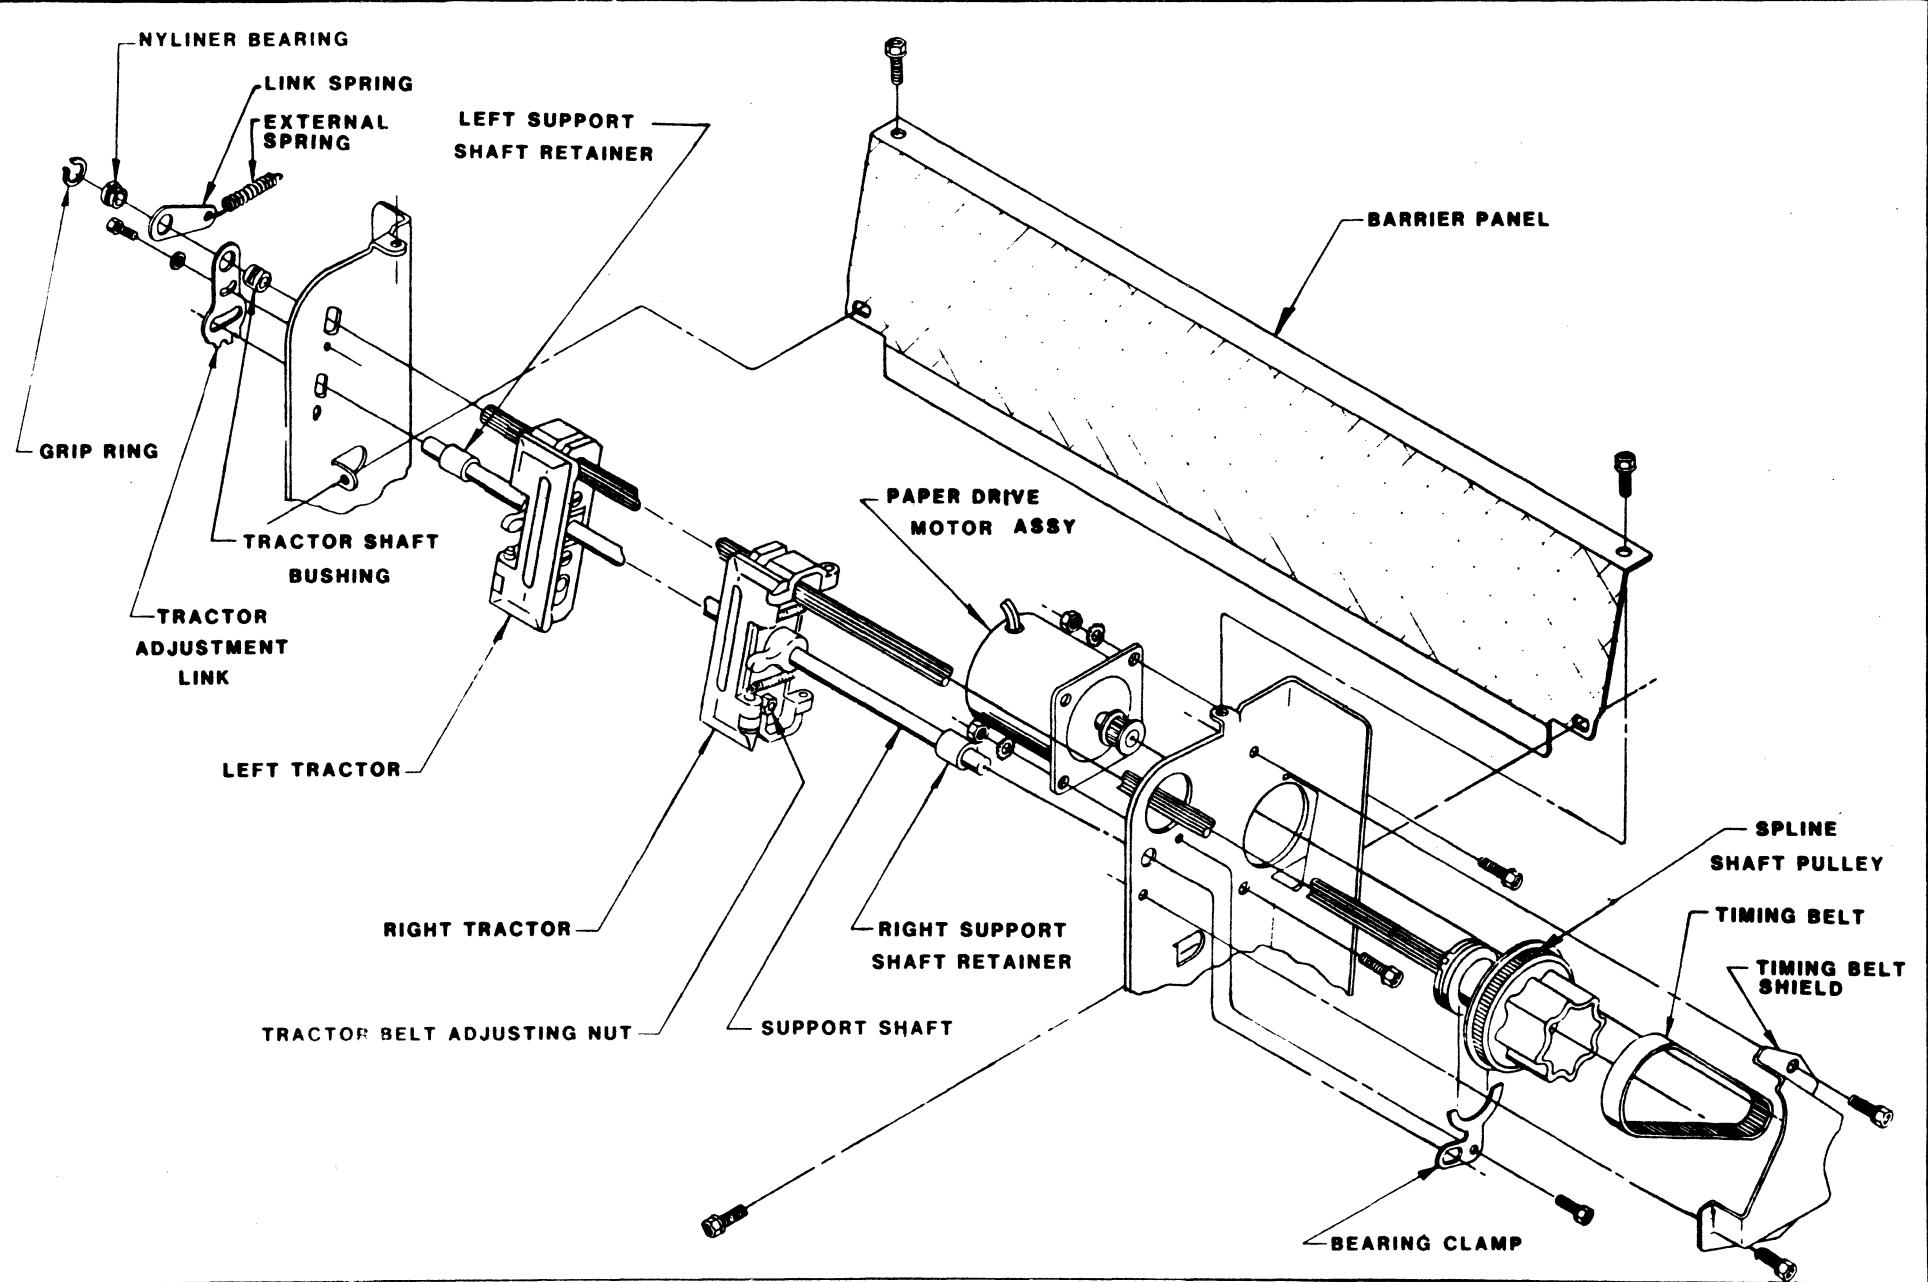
The Spline Shaft Assembly and the Support Shaft
